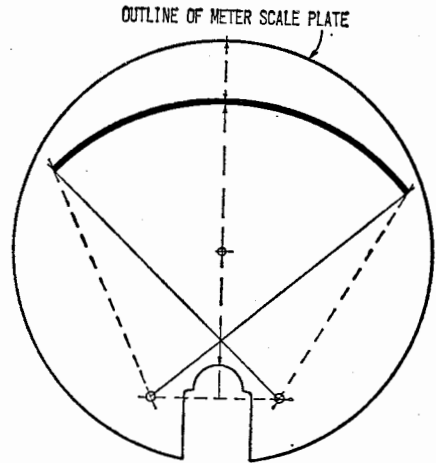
Draw new meter face outline, increasing old meter face diameter by scale enlargement factor. Enlarge original cut-outs and space between old mounting holes, using same enlargement factor.
